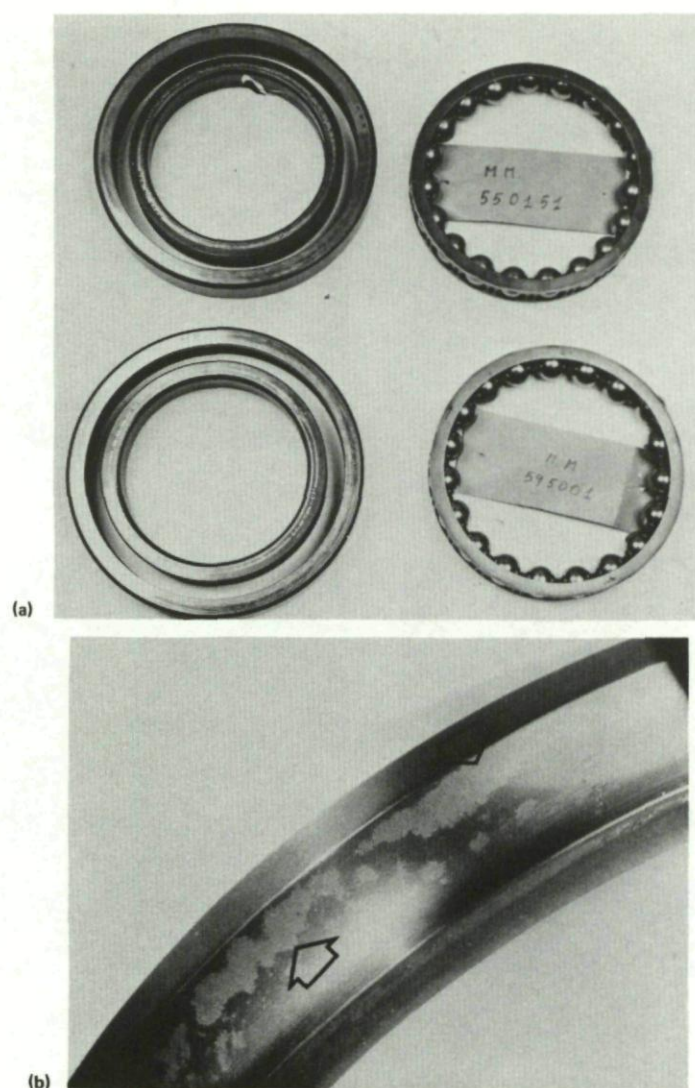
Fretting corrosion in propeller shaft ball bearings
